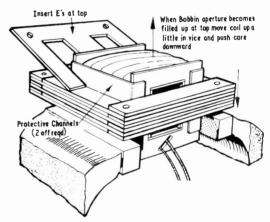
Method of inserting laminations alternately. The insulating coating should face the same way throughout
